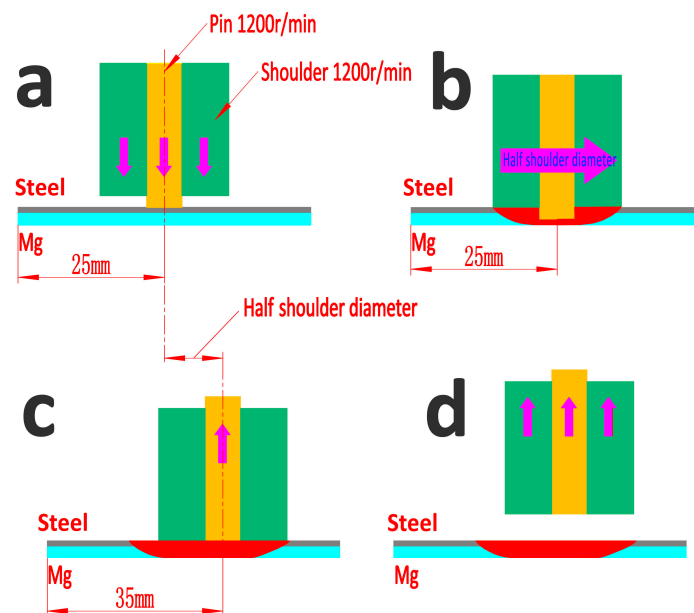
The diagram of new keyholeless spot welding: (a) The start of welding; (b) the welding process with the retraction of the pin; (c) the finished retraction; and (d) the end of welding.
